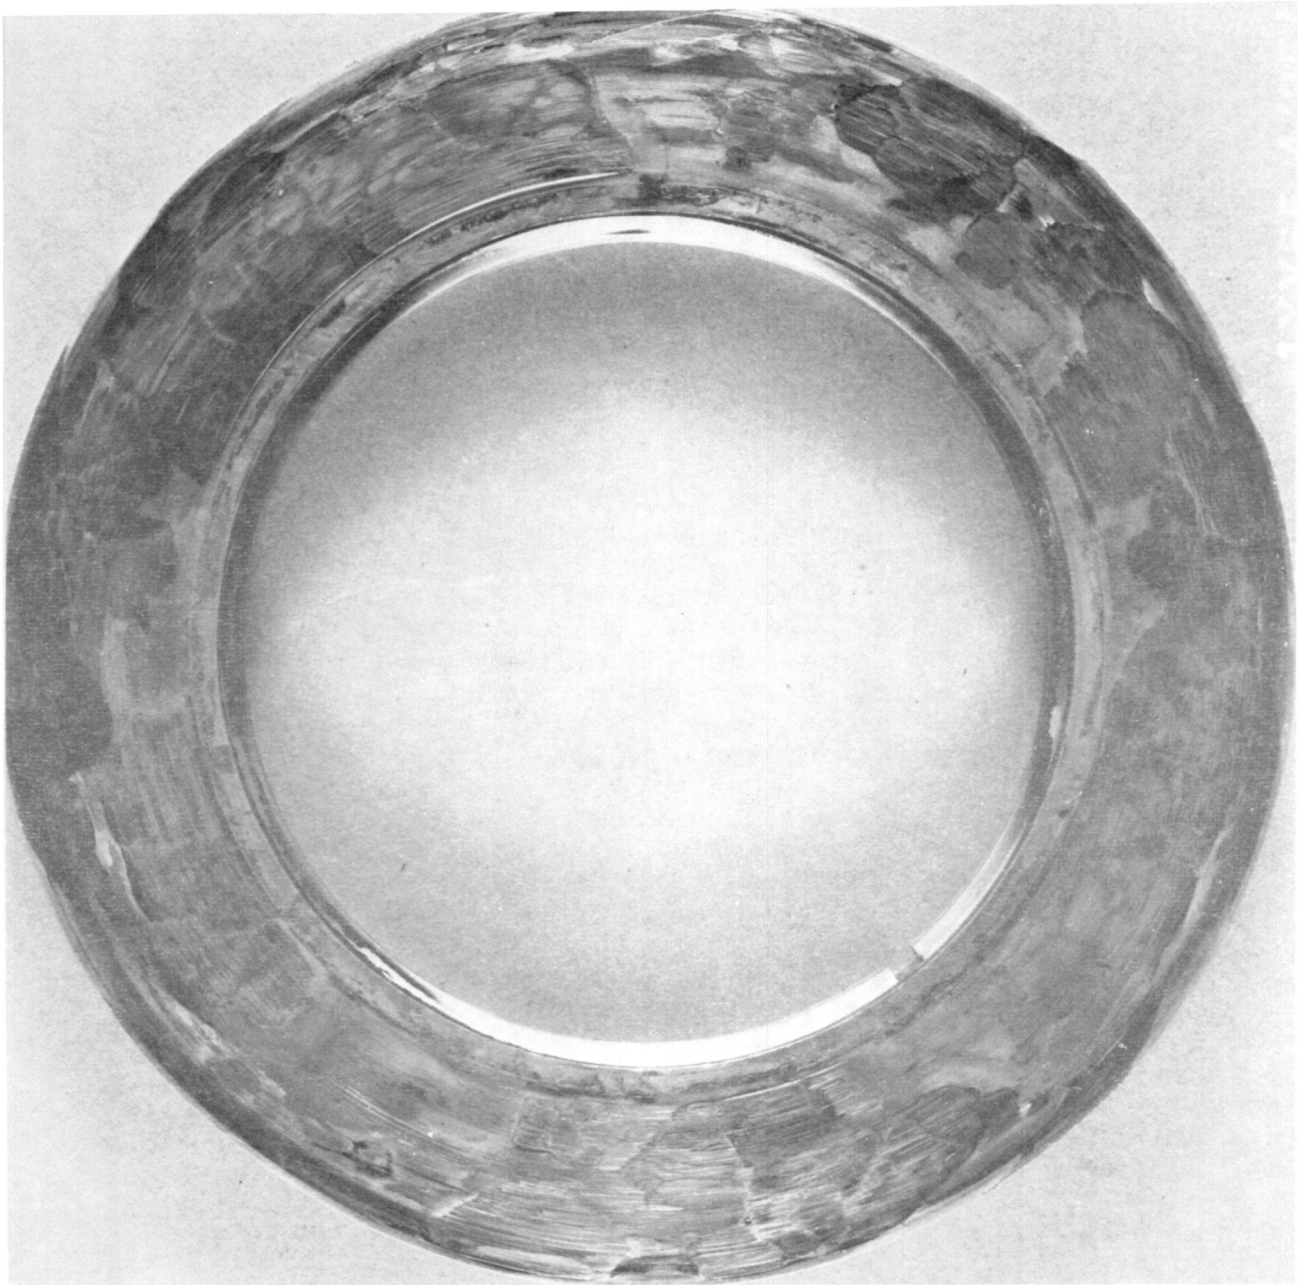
Spiral Groove LOX Seal Mating Ring RS009696E (C28-2500-015), S/N 02, Posttest 145, Build 5
